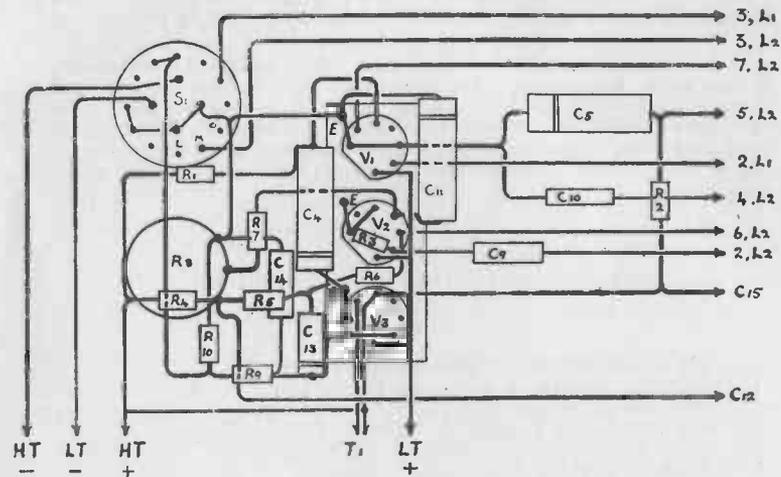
Point-to-Point Wiring Plan of the "Carri-Minor"
